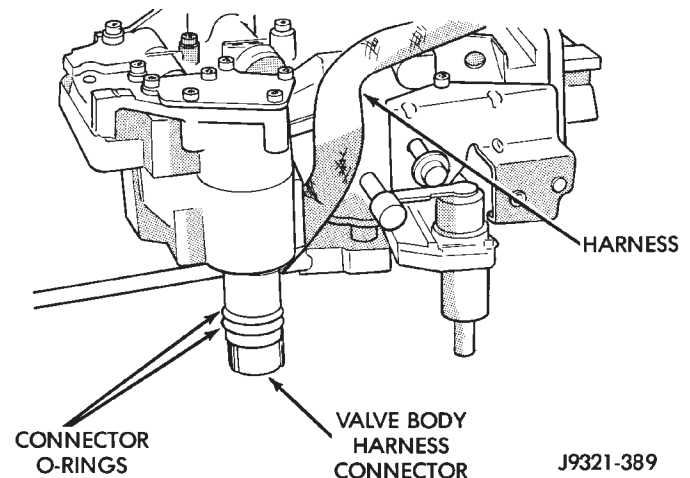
Valve Body Harness Connector O-Ring Seal Locations
